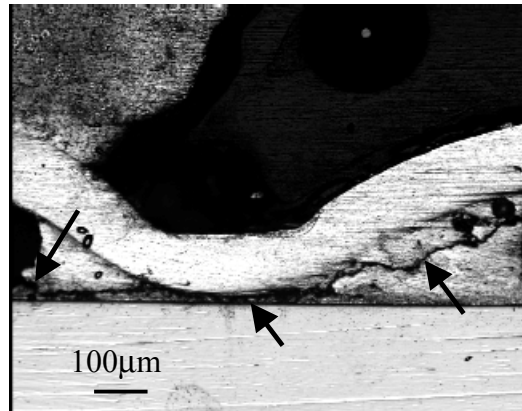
Cross-section of a dimple solder joint after 12,700 cycles.
